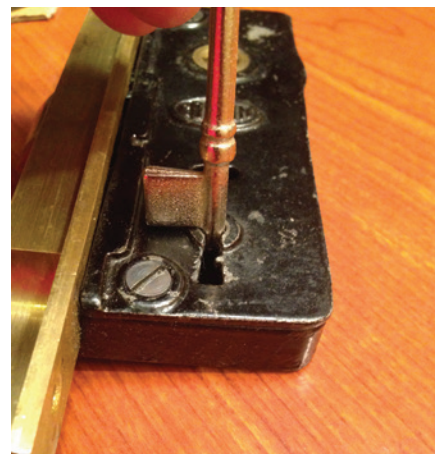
The author is checking to make sure the tip of the blank fits and turns in the top of the keyway.
